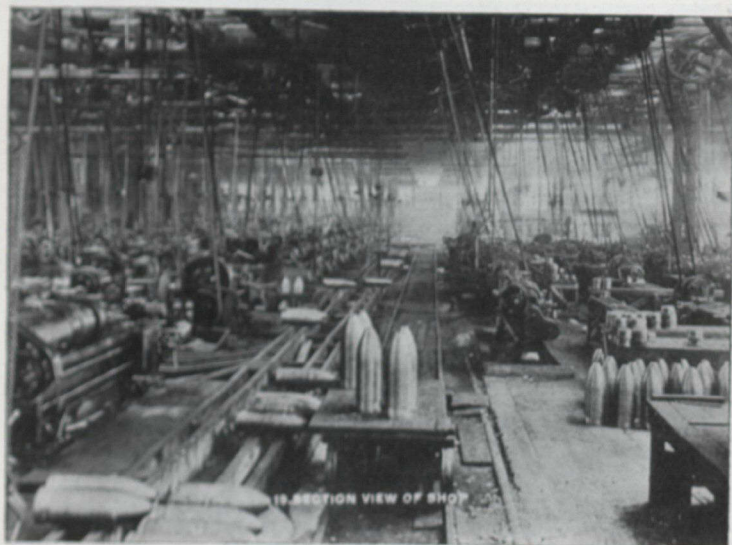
9.2 inch shell shop, St. Lawrence Bridge Company.
